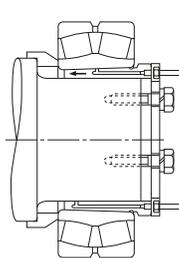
Mounting With Special Sleeve and Hydraulic Pressure
